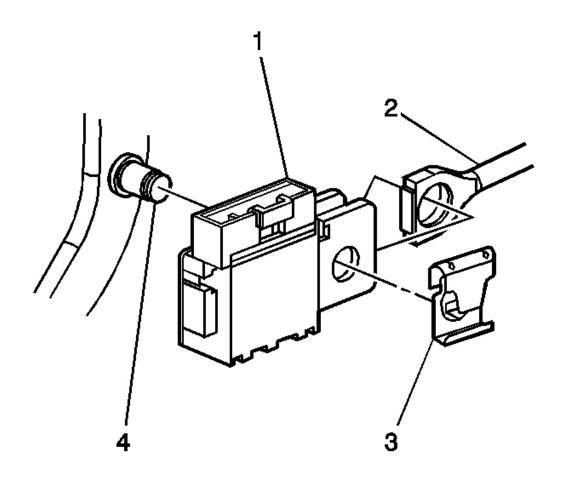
Identifying Brake Light Switch Components Courtesy of GENERAL MOTORS CORP.
